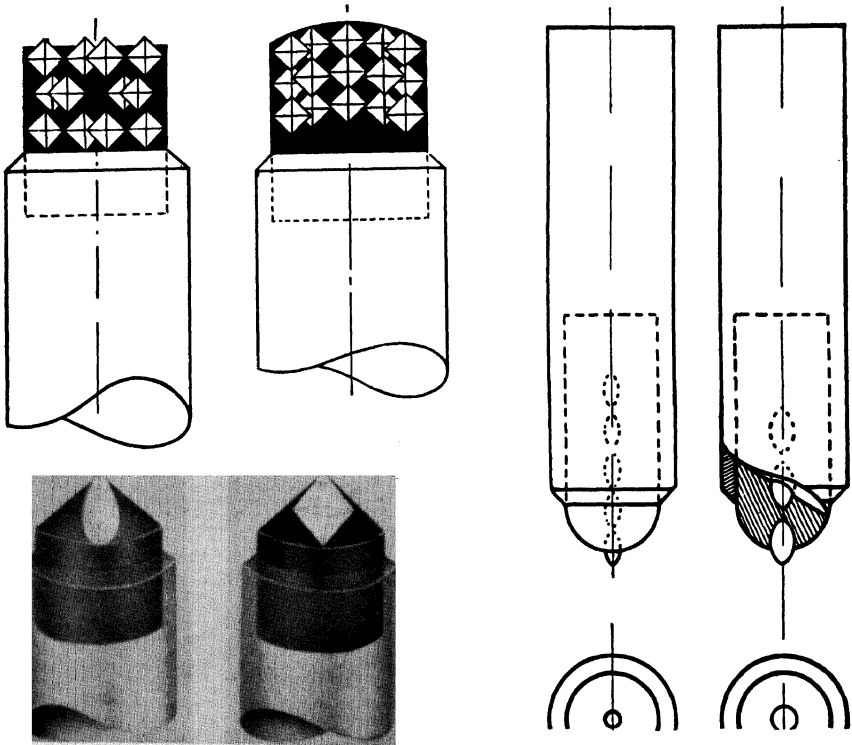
Variety of single and multiple diamond wheel dressing tools (courtesy of P. Schwarzkopf and Consolidated Diamond Tool Corp.).
